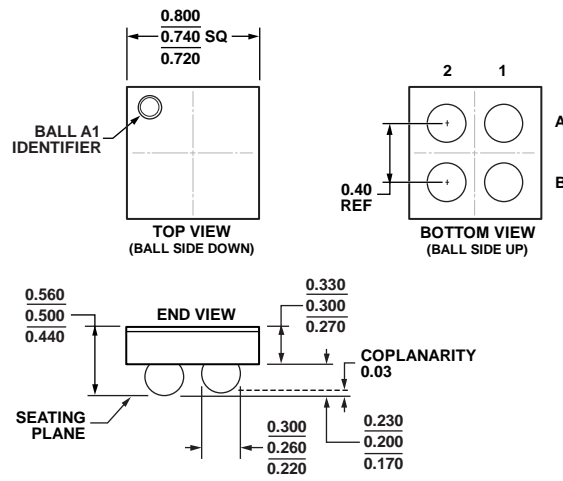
4-Ball Wafer Level Chip Scale Package [WLCSP] (CB-4-5)
